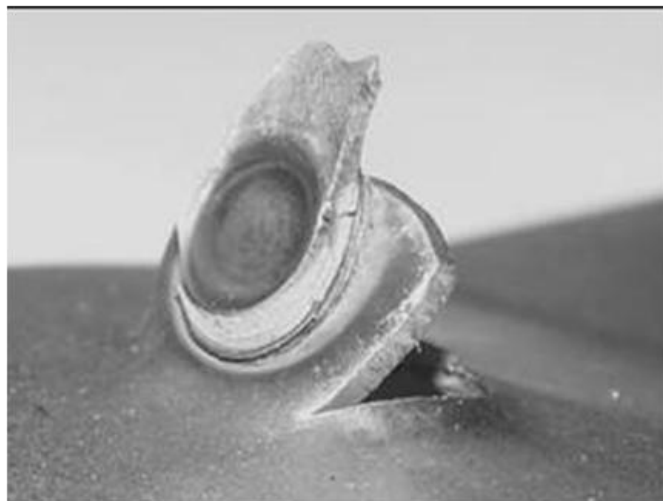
Weld failure in the base material after three step weld scheme in TRIP700 steel containing 0.187 wt% C and 0.087 wt% P (Den Uijl & Smith, 2006).
